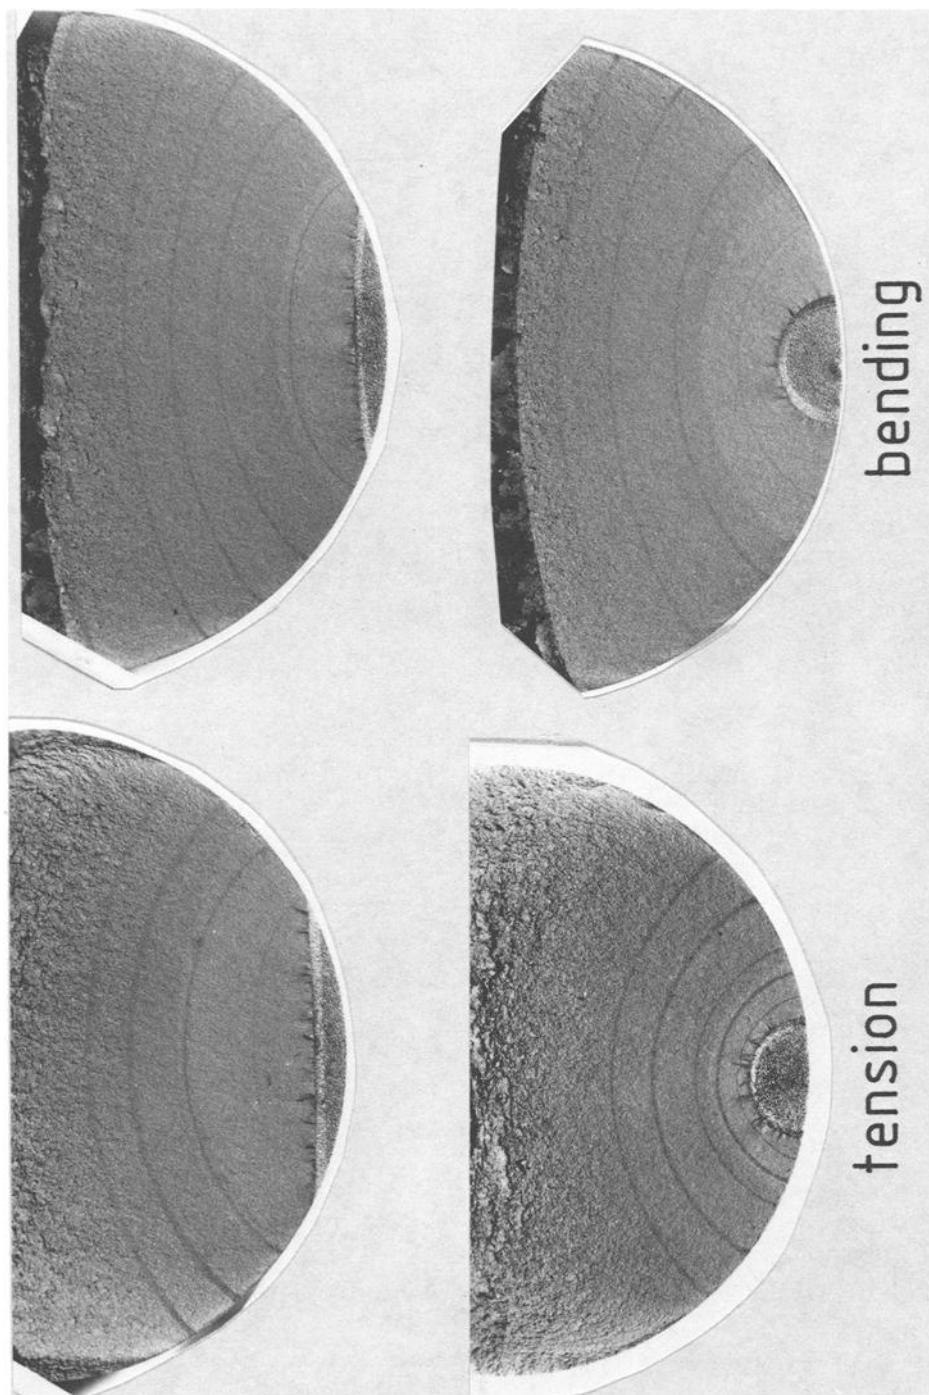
Fatigue fracture areas with beach marks.
